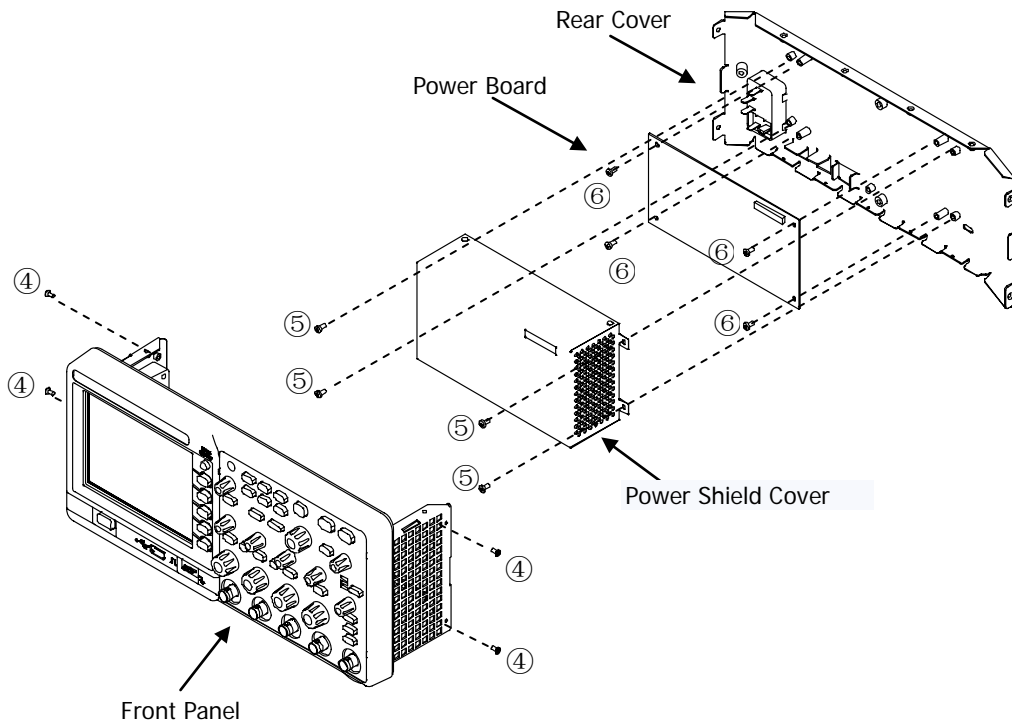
To Disassemble and Assemble the Rear Metal Cover and Power Board
